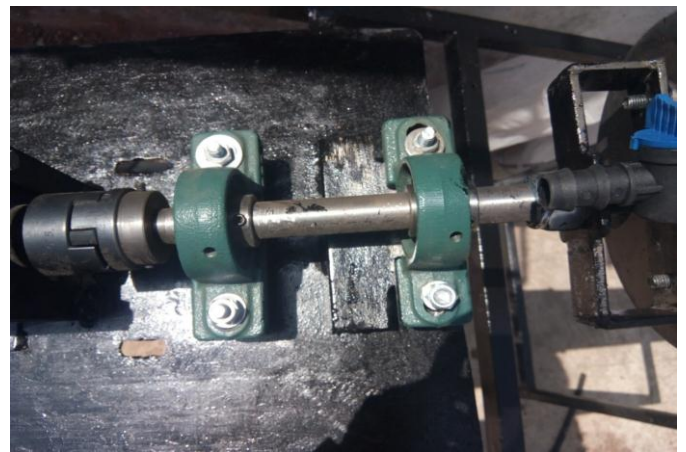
Shaft Arrangement between the motor and PVC pipe
